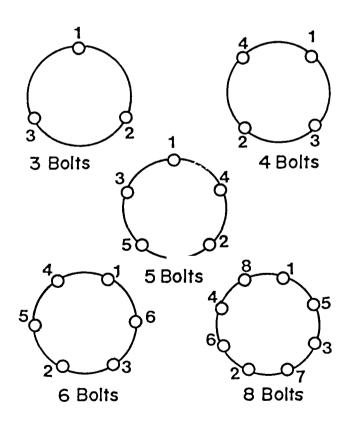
Bolt tightening sequence (for sizes not larger than 300 mm).
